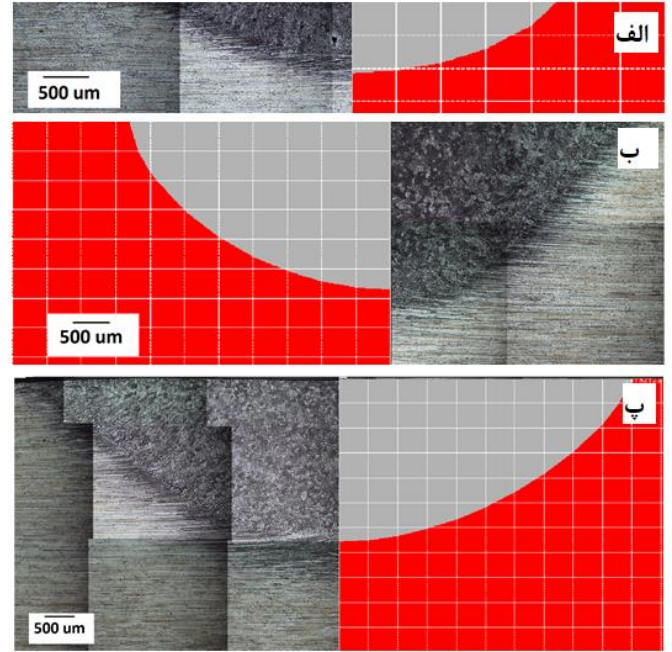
Validating the finite element models using the dimensions of the weld pool
